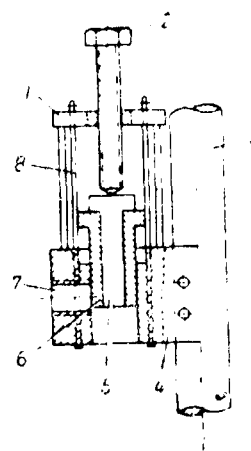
Pressing in the Gudgeon Bushing of Vertical Rudder: 1 - release strip; 2 - pressure bolt; 3 - rudderhead; 4 - gudgeon; 5 - arbor; 6 - bushing; 7 - hole for plug; and 8 - hooks.
